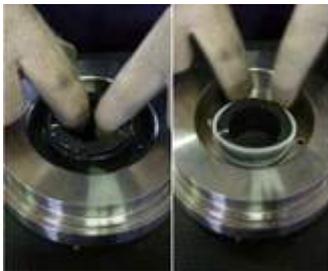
Insert the gasket of the bearing sleeve (411.1) into the relevant seat of the impeller (230).
